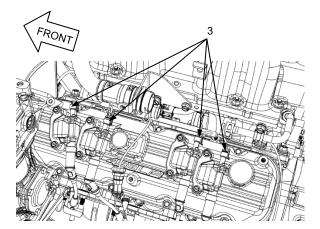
Ignition Coil Harness Connectors (3). NOTE: *Driver side shown; passenger side similar.
